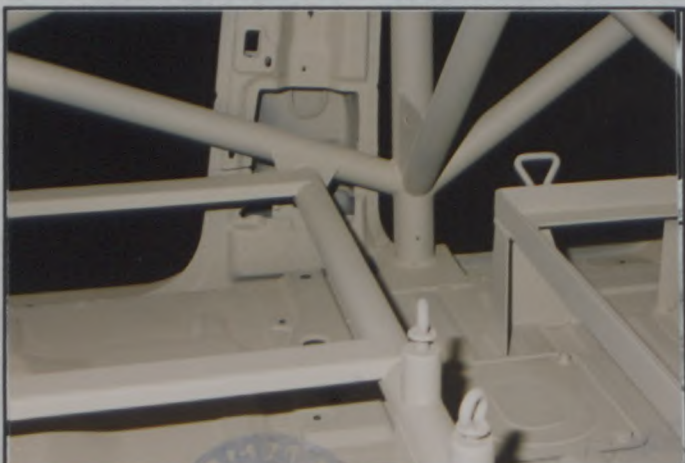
MAIN HOOP TO CENTER PILLAR
